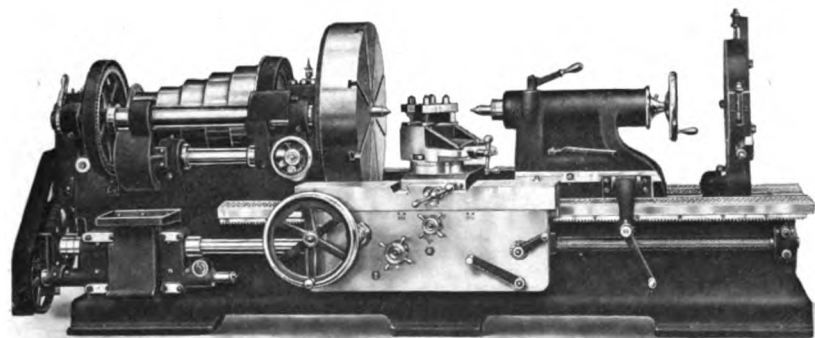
Bradford 42-Inch Triple Geared Lathe
